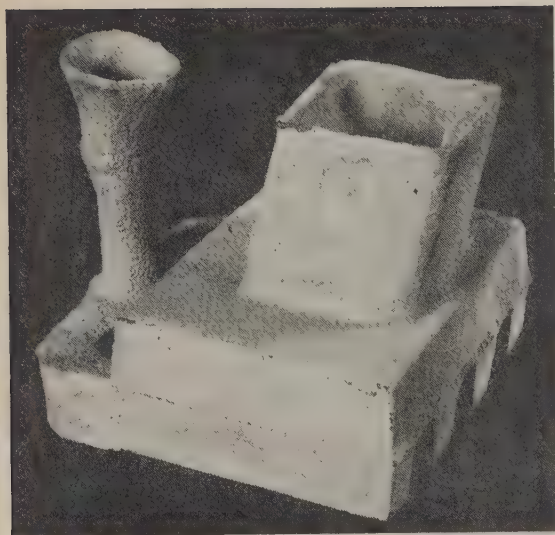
4-KEEL TEST-BLOCK CASTING SHOWING GATE AND RISER
